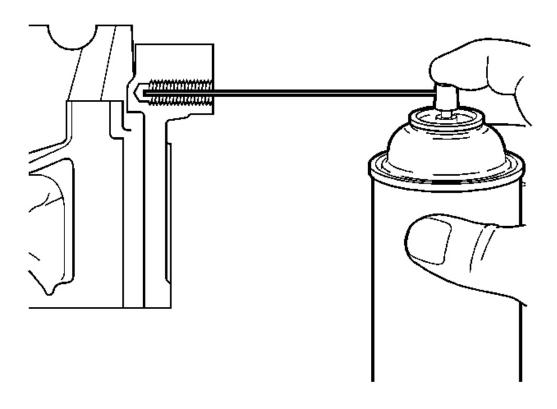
Spraying Cleaner Into Tapped Hole Courtesy of GENERAL MOTORS CORP.
